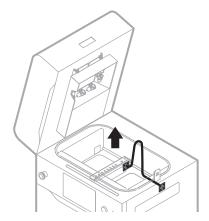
Dragging out the plate without spring above the Recoater's roller.
